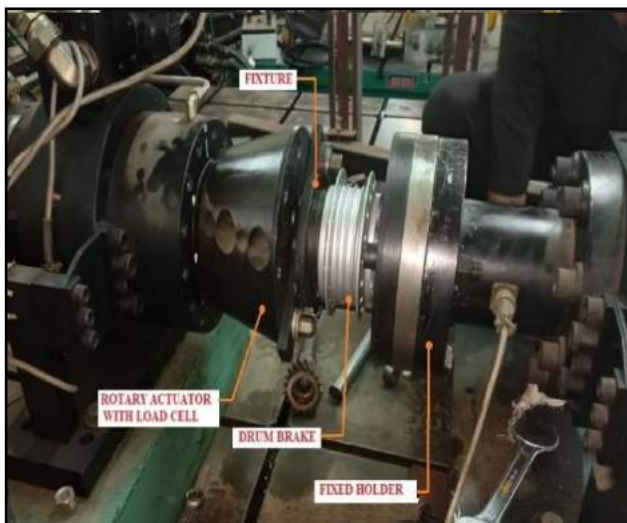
Drum Brake loading on Fatigue Test Rig.
